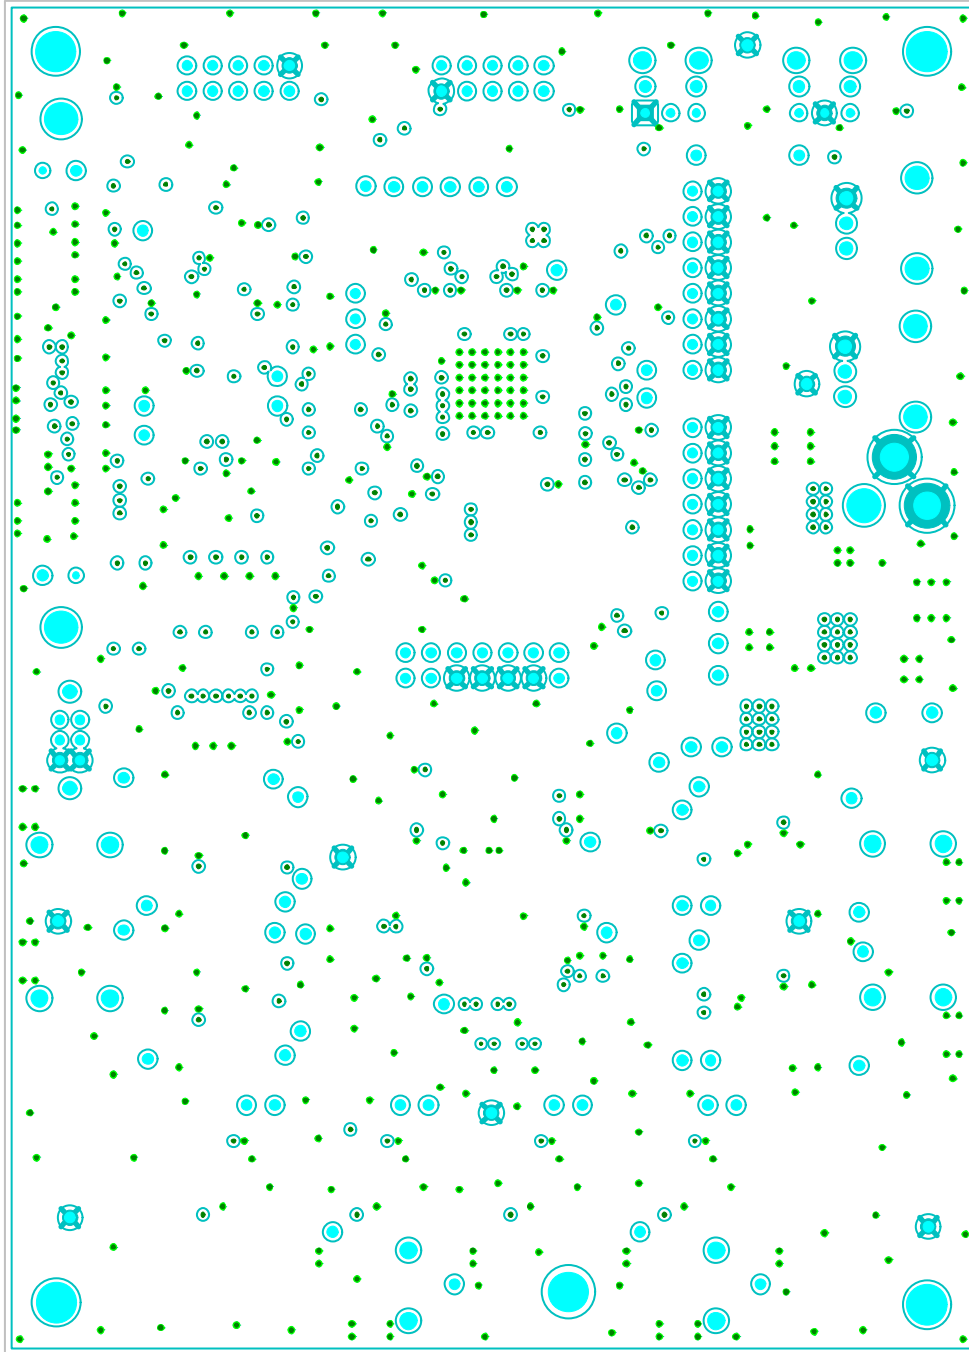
EVAL-ADAU1467Z Layout, Top Assembly and Silkscreen
